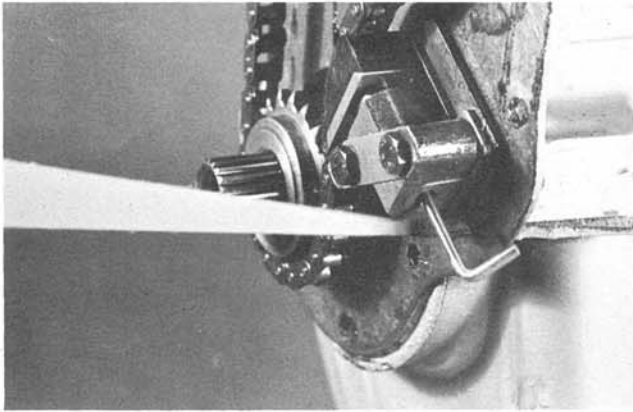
CHAIN TENSIONER ADJUSTMENT
